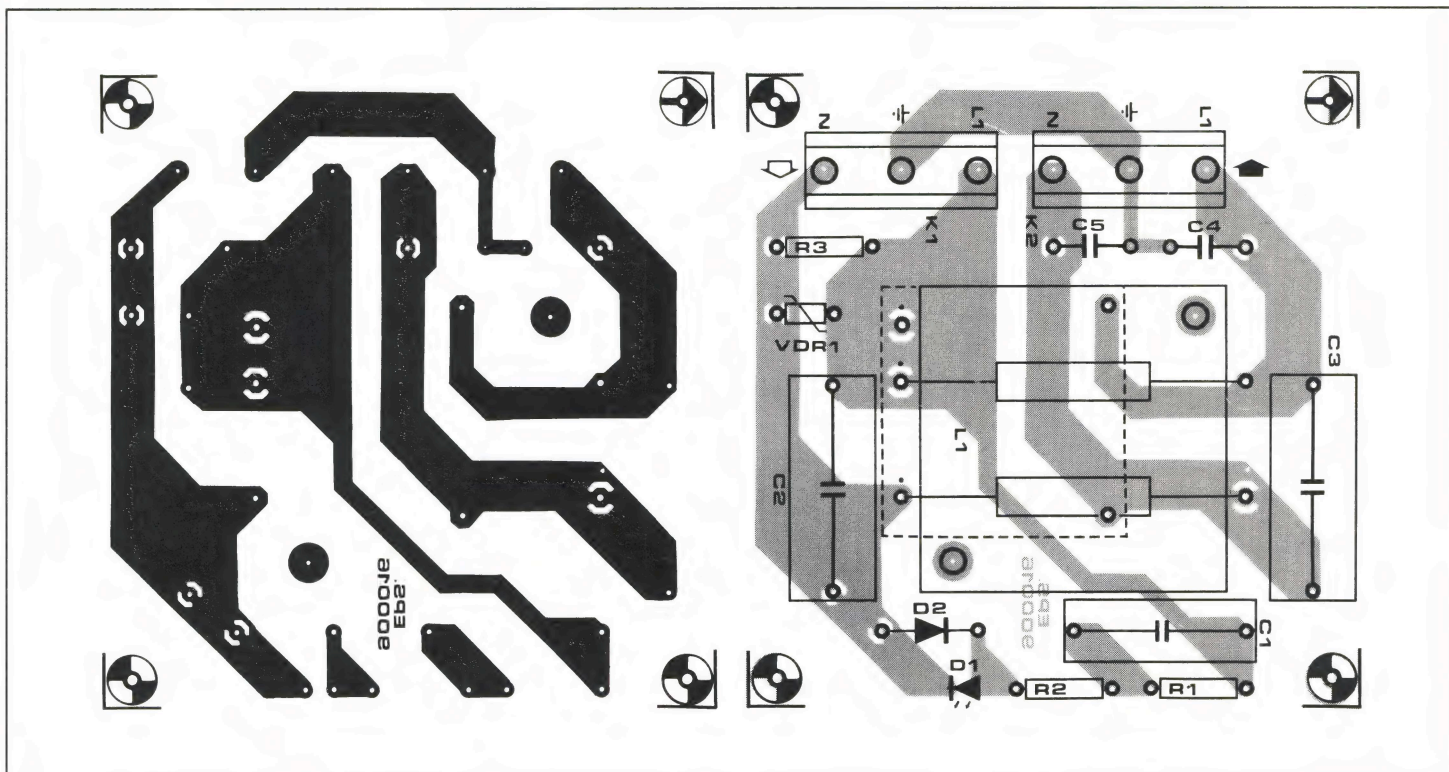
Track layout (mirror image) and component mounting plan of the printed-circuit board for the mains filter.
